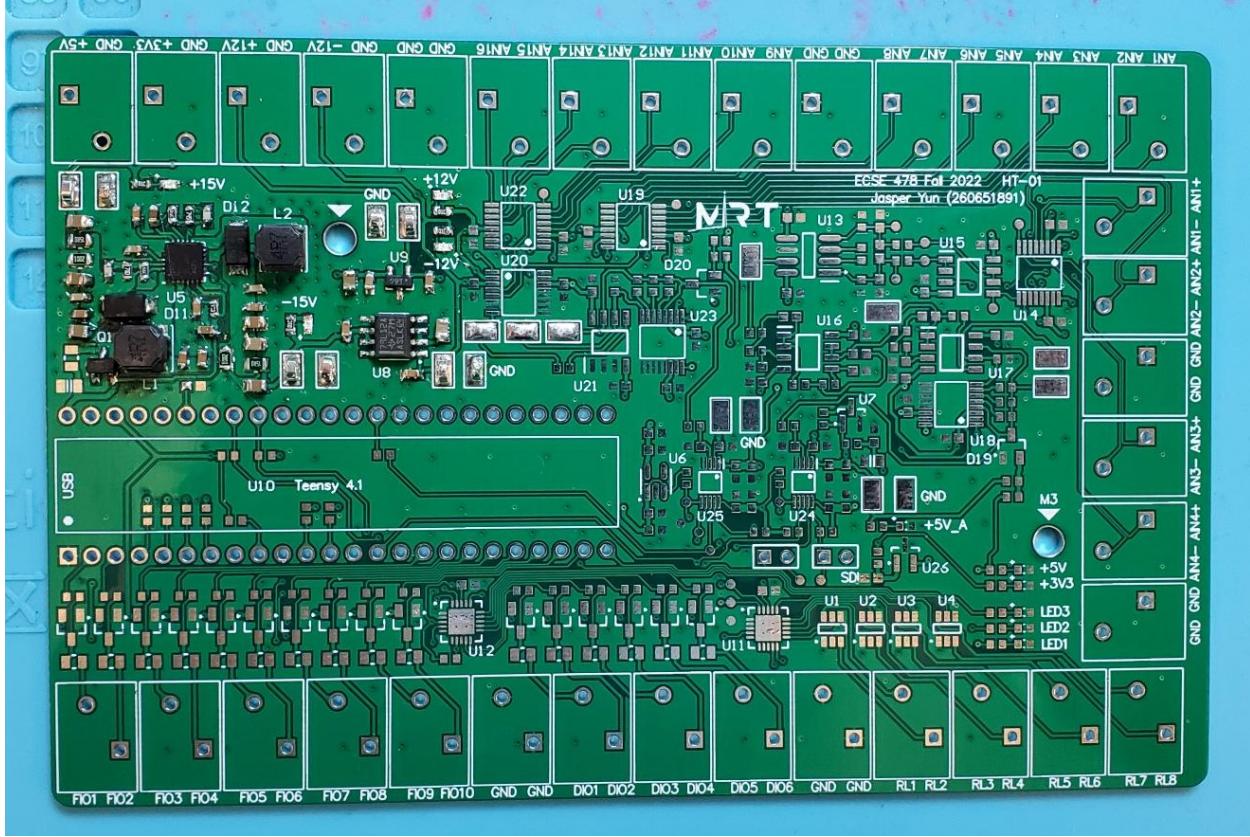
Top view photograph of the power supply circuitry soldered to the eval board.
